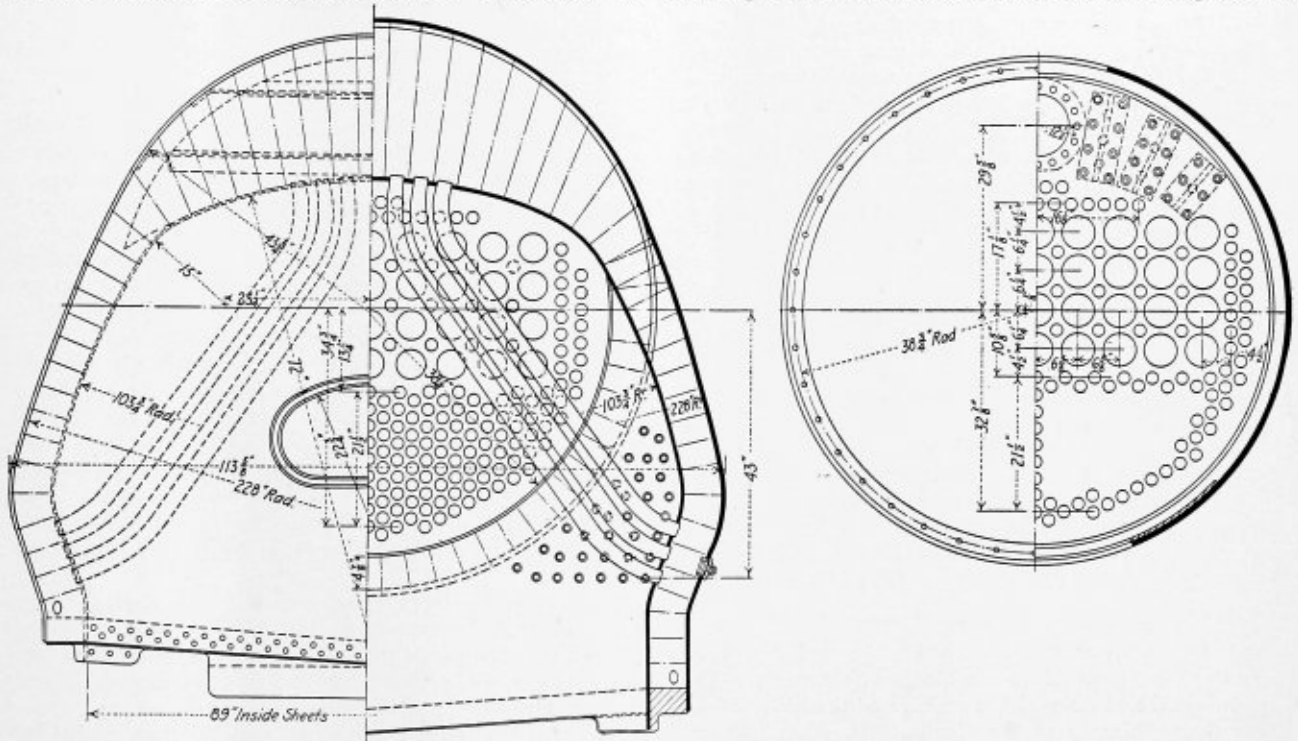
Sections Through Firebox and Barrel of Boiler
